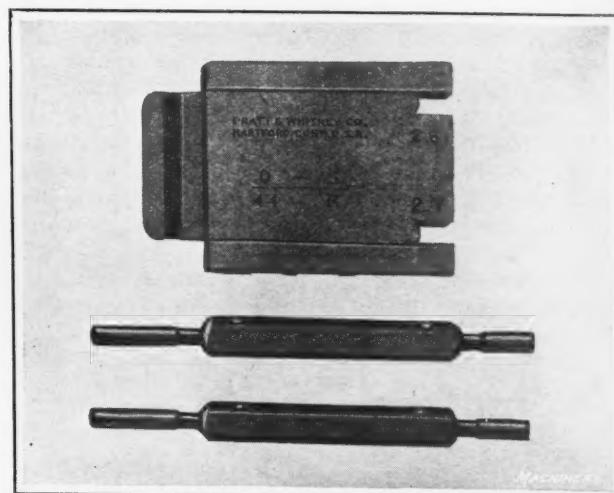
Reference Gage made by Strips attached to Sides of Blank
